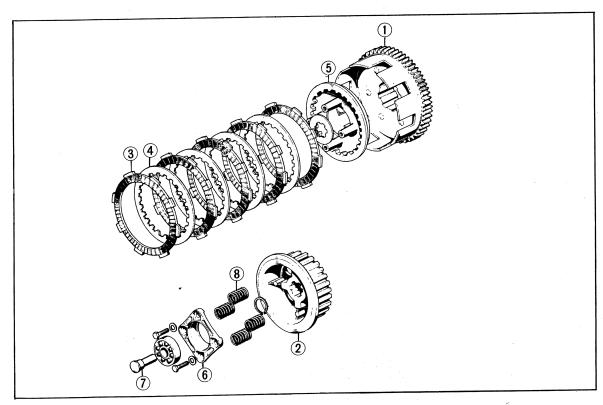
① Clutch outer complete ② Clutch center ③ Friction disc ④ Clutch plate ⑤ Clutch pressure plate ⑥ Clutch lifter plate ⑥ Clutch lifter guide pin ⑧ Clutch spring
